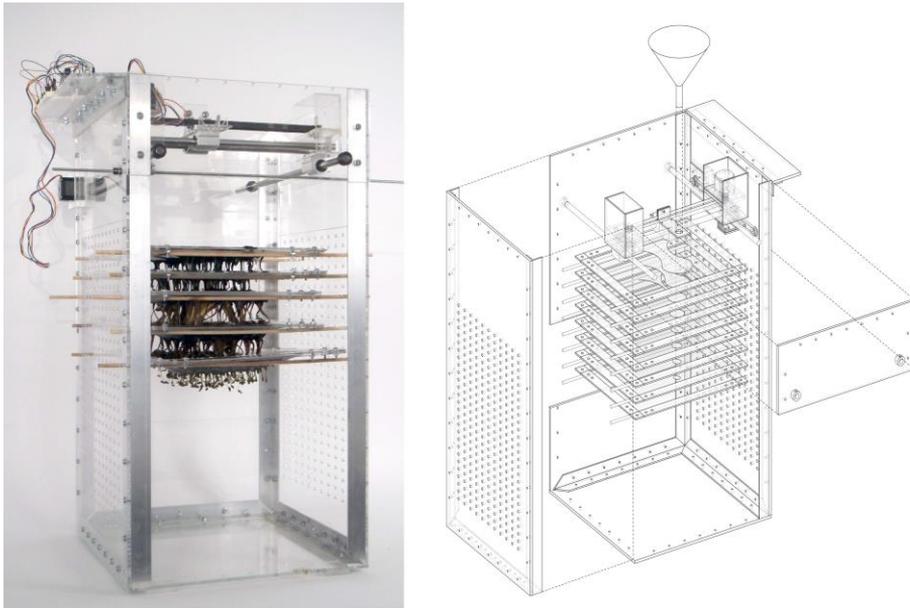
Motion Capture 3D Printer and Axonometric Drawing
